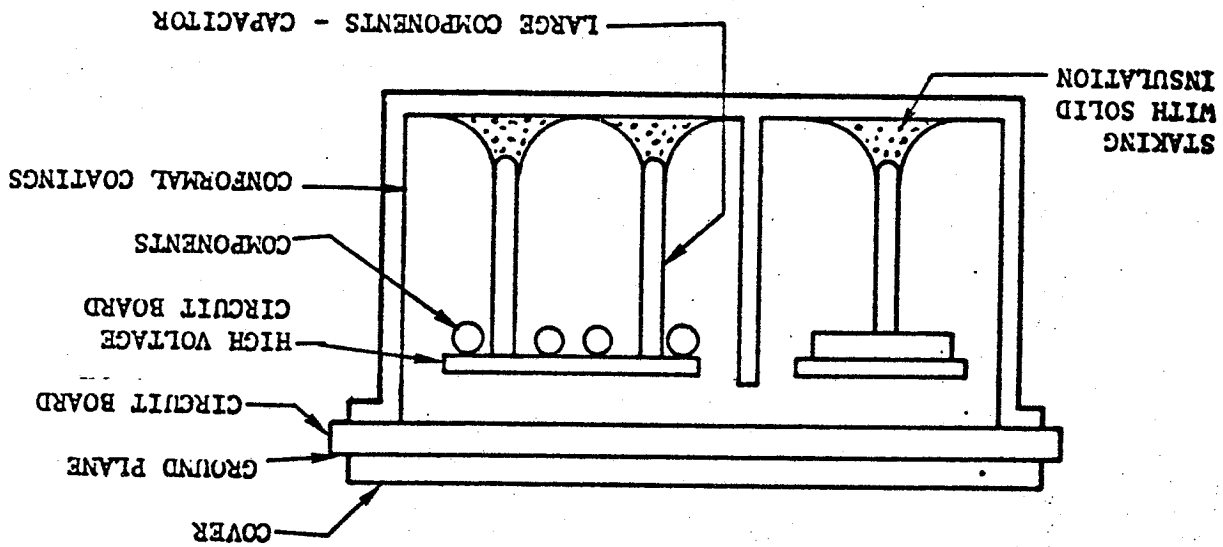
OPEN CONSTRUCTION PACKAGING
